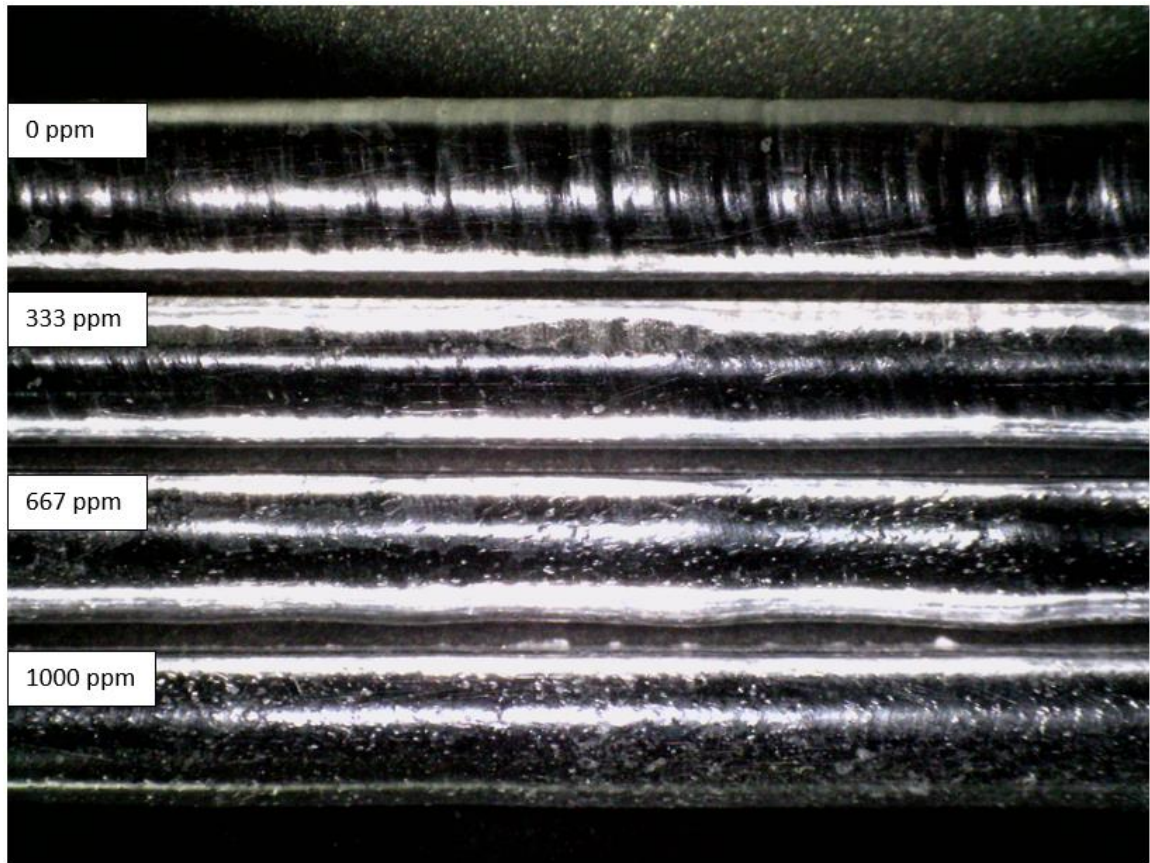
Photograph of 1100 weld metal, exhibiting sub-surface porosity with varying amounts of shielding gas hydrogen at a travel speed of 3.39 mm/s.
